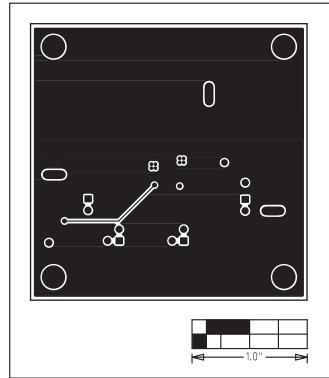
MAX17083 EV Kit PCB Layout—PGND Layer 2
